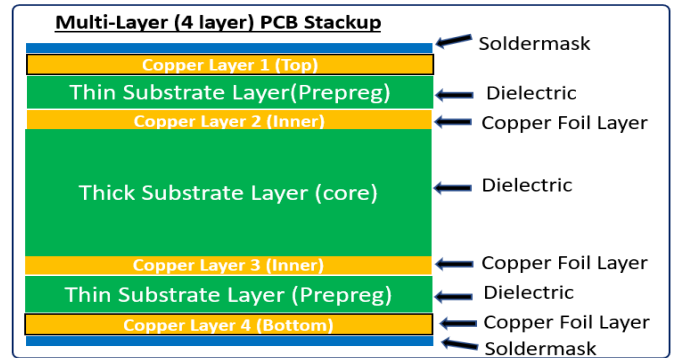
Multi-Layer Stackup 1 (4-Layer)
